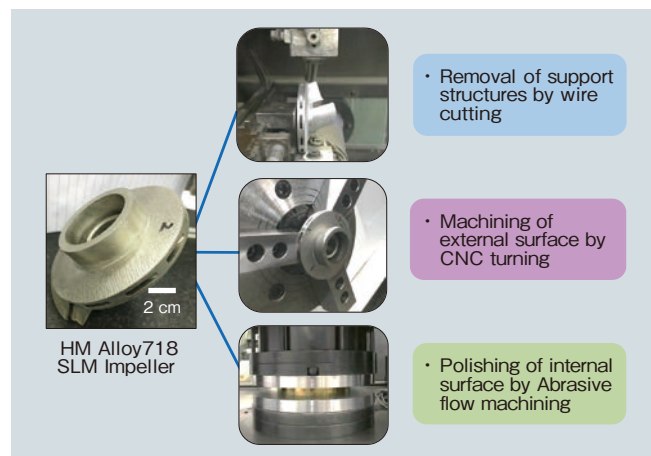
The methodology employed for post-machining of SLM-built impellers
